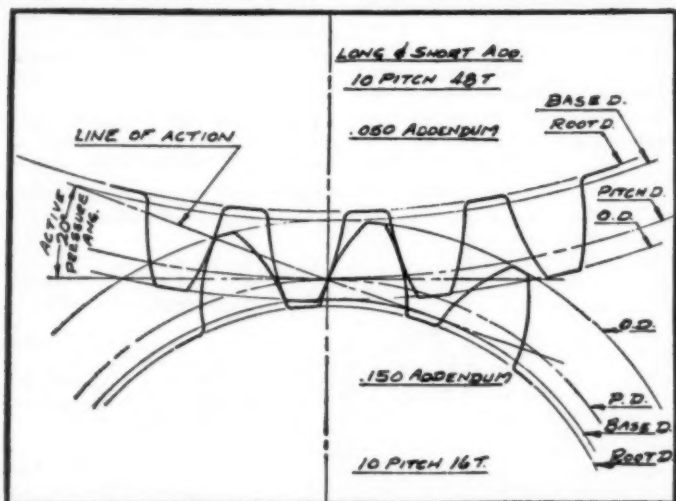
Long and short addendum gears run at standard center distance, cut with standard shaper cutter 10 pitch, 20° pressure angle. Rolling diameter and active pressure angle do not change.
